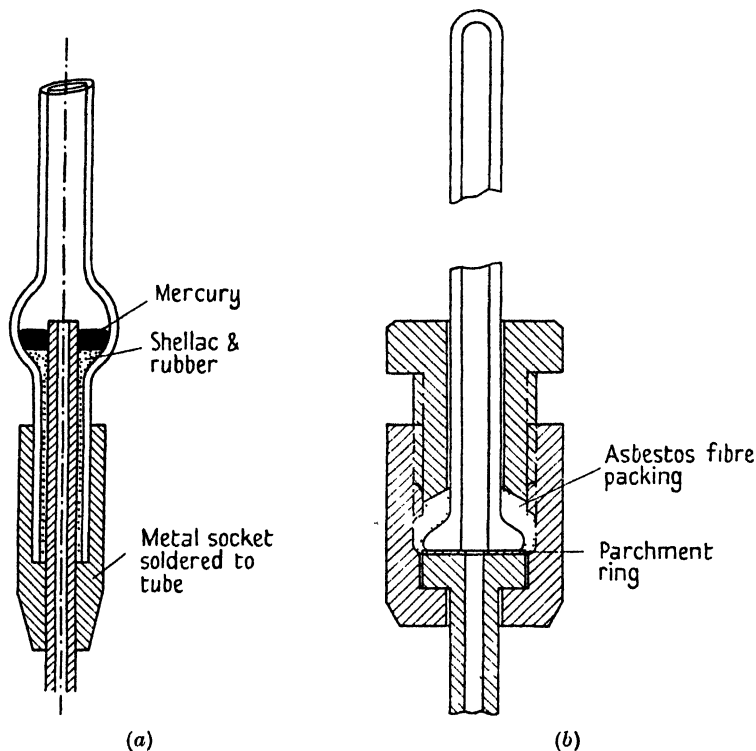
(a) Metal-glass pressure joint. (b) Packing gland for metal-glass joint.
